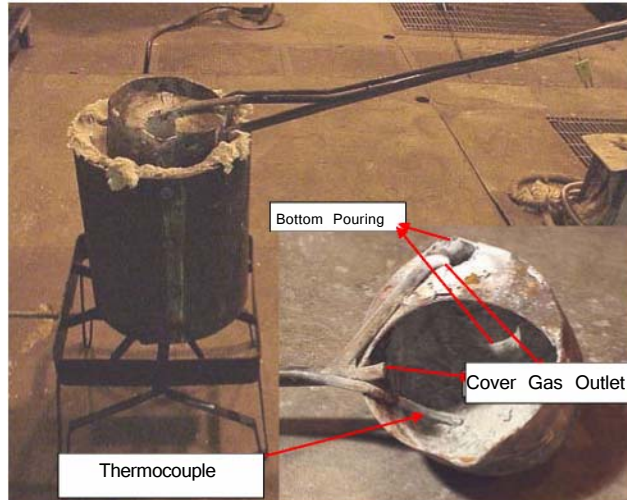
Bottom-tapping steel holding ladle (inset) and propane fired heater.
